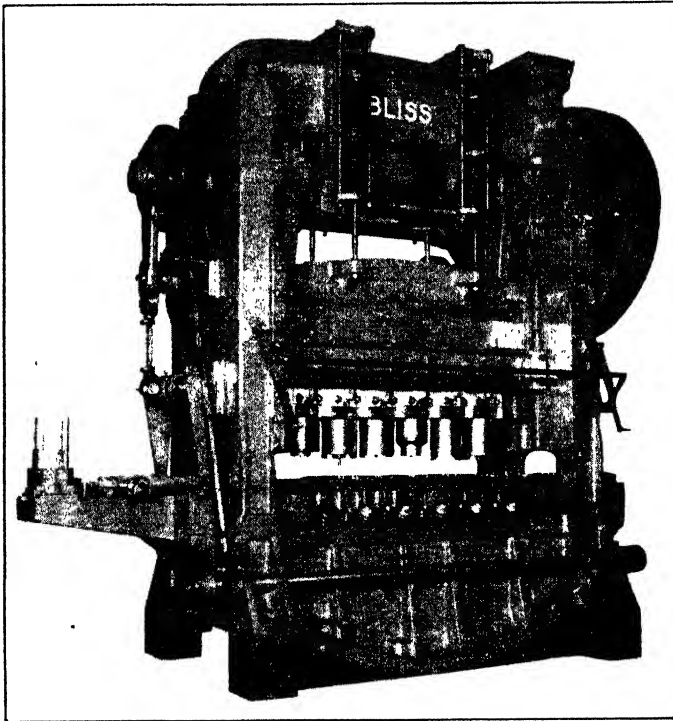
A 7-in.-shaft, 96-in. wide multiple slide press of the straight-sided type, for a series of six operations from a flat blank to a drawn and trimmed shell of odd contour.
